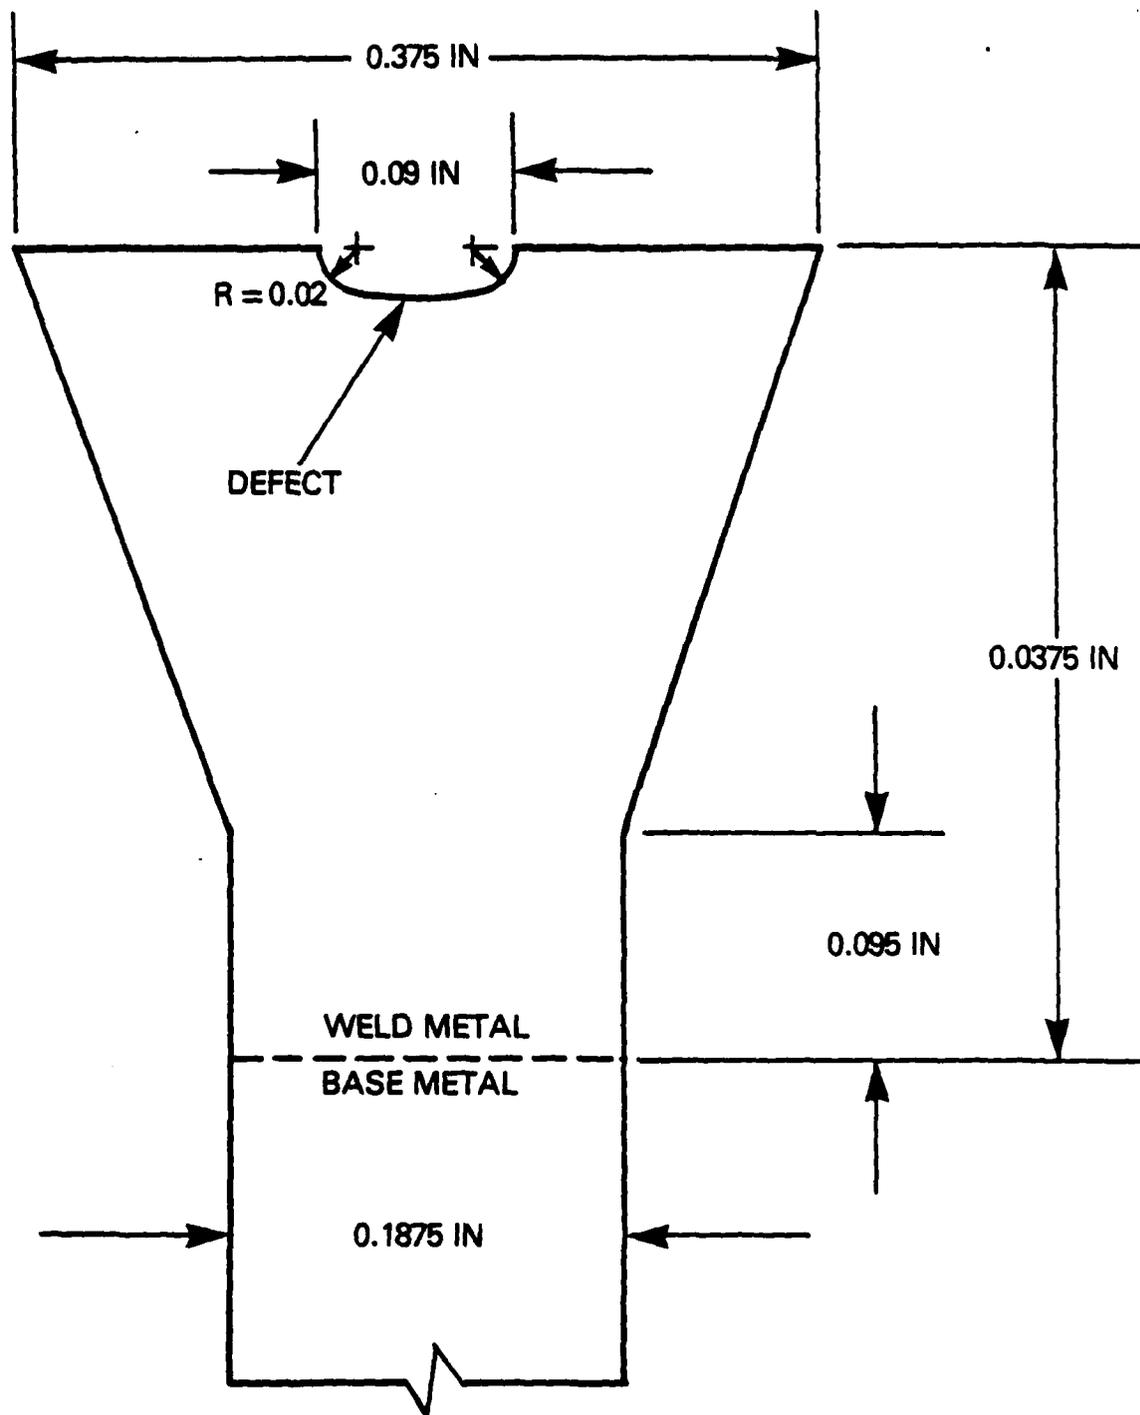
Butt Weld Geometry and Defect Geometry
